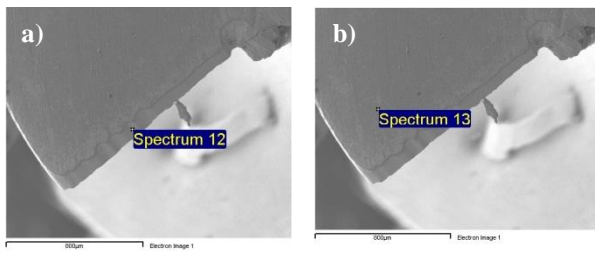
SEM on HSS steel drill; (a) Build-up edge, (b) Severe adhesive on drill flank.
